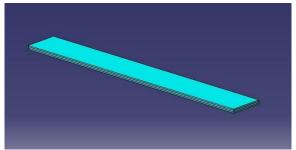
Aluminium Plates with Sandwich Material Thickness 3.0 mm
